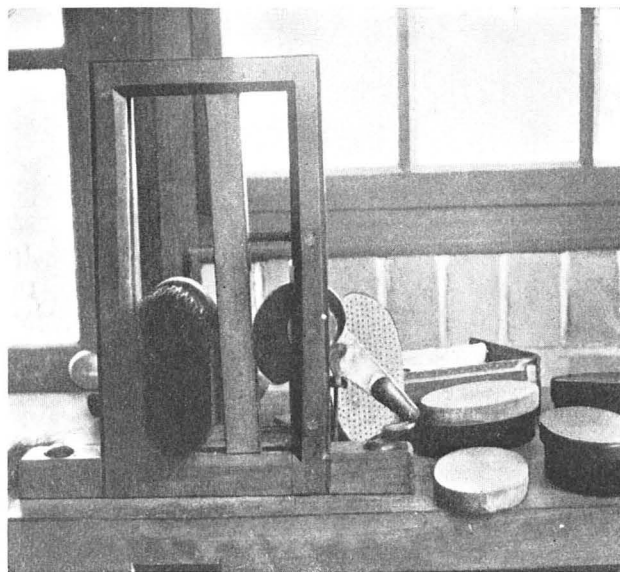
Adjustable Frame Clamp for holding brush blocks while bristles are being drawn.
